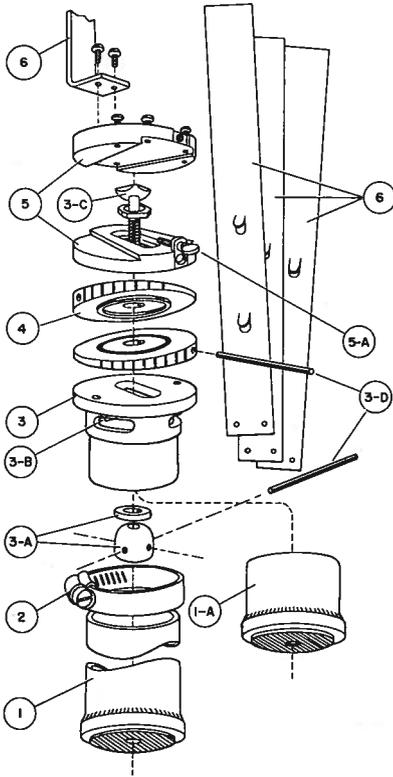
Exploded view of the United States Manufacturing Co.'s adjustable unit for use in immediate post-surgical fitting. The unit consists of six elements: 1. pylon tube, 2. metal hose clamp, 3. base plug, 4. wedge disks to provide for adjustment of socket tilt, 5. quick disconnect, 6. socket-attachment straps.
